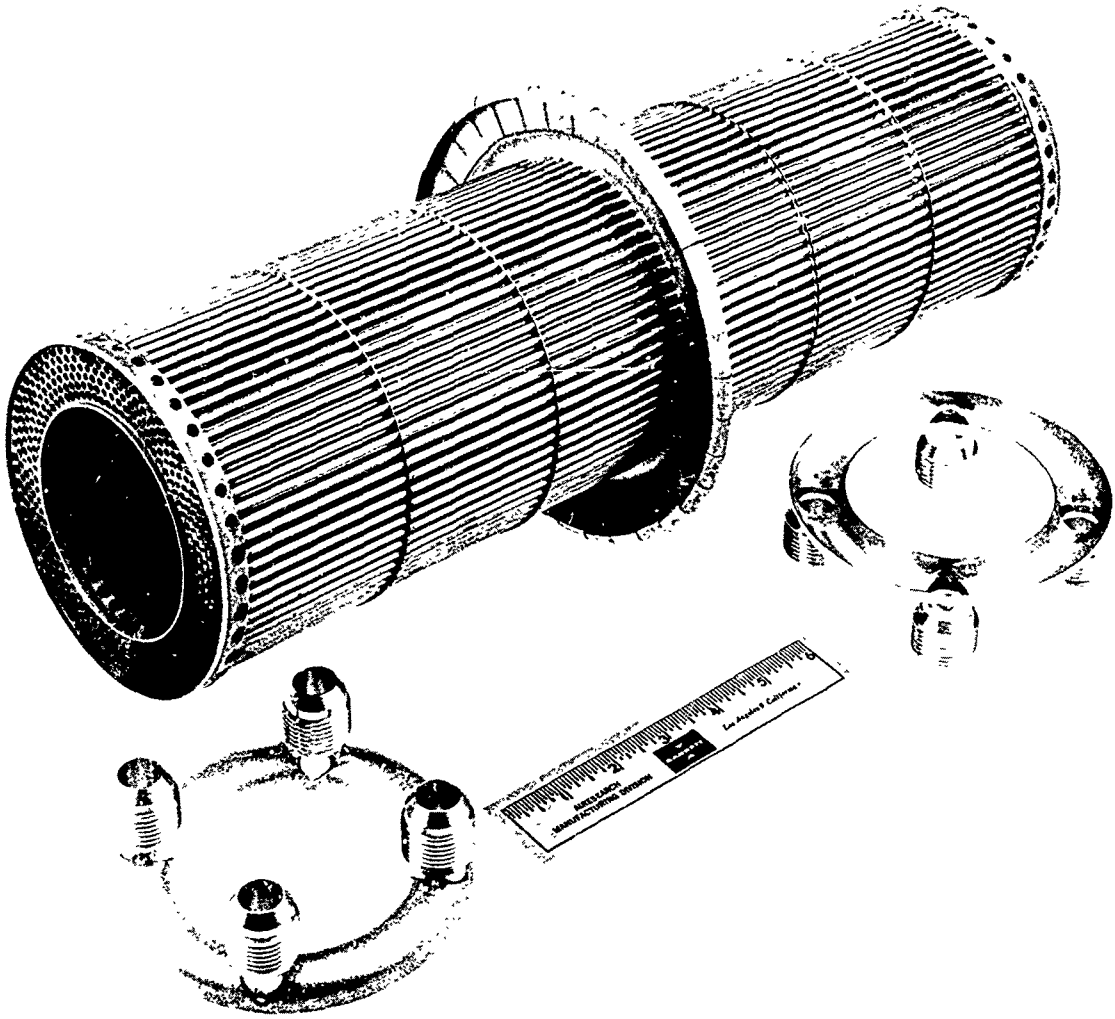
Example of Tubular Heat Exchanger With Brazed Tube-Header Joints.
